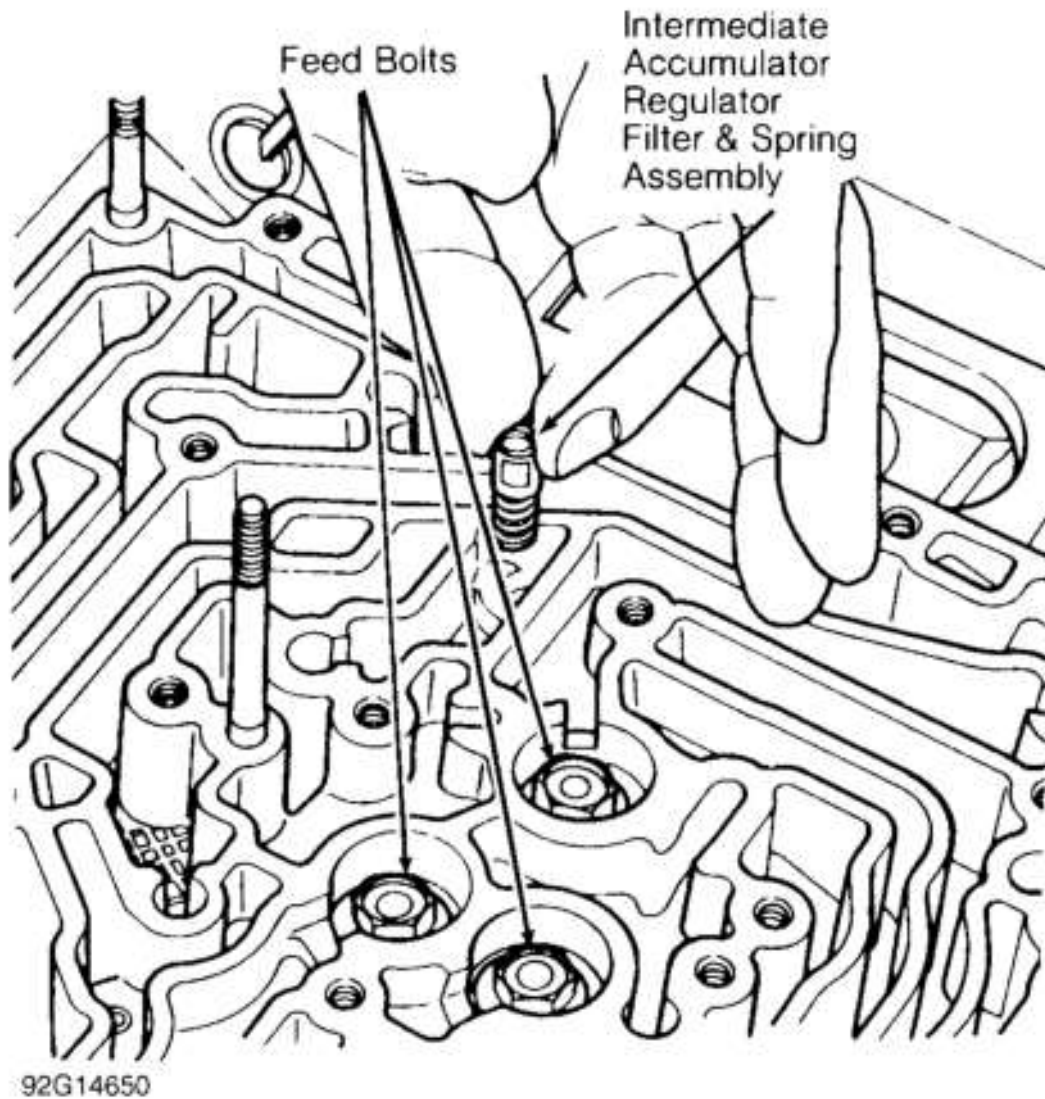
Removing Intermediate Accumulator Regulator Assembly
